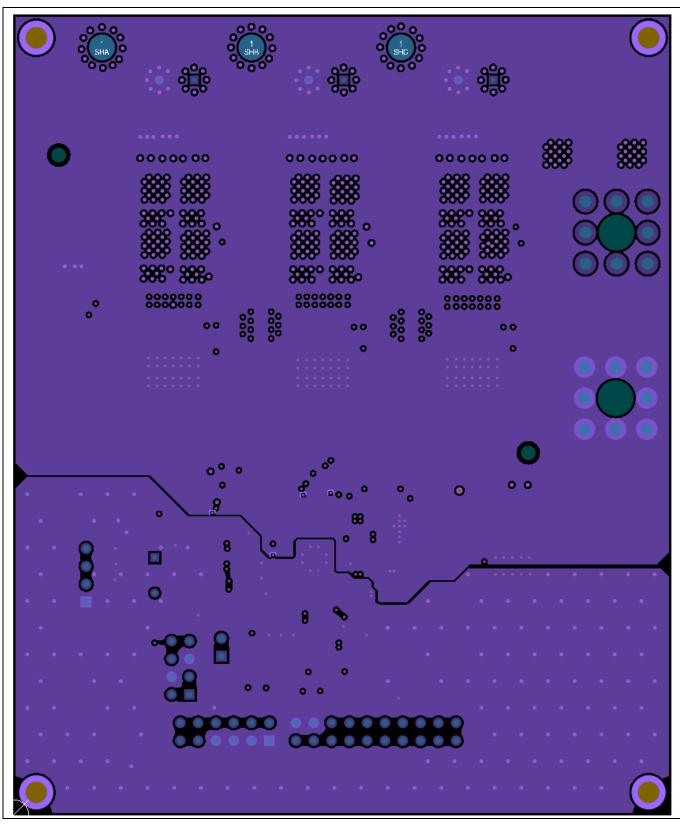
EVAL_6EDL7141_1KW_36V PCB inner layer 3
